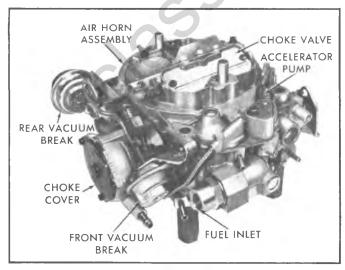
M4MC/M4MCA Quadrajet Carburetor
